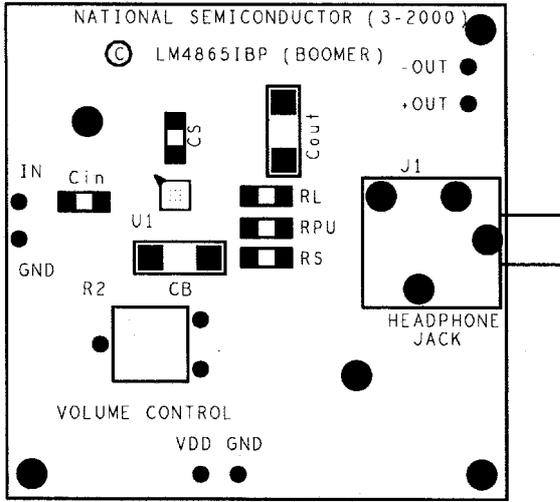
Recommended micro SMD PC board layout: component side silkscreen
